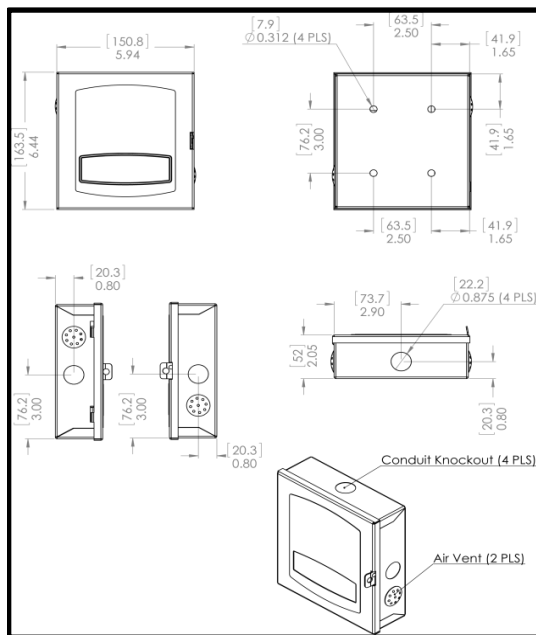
CO/NO2 Hinged front panel Enclosure Dimensions
